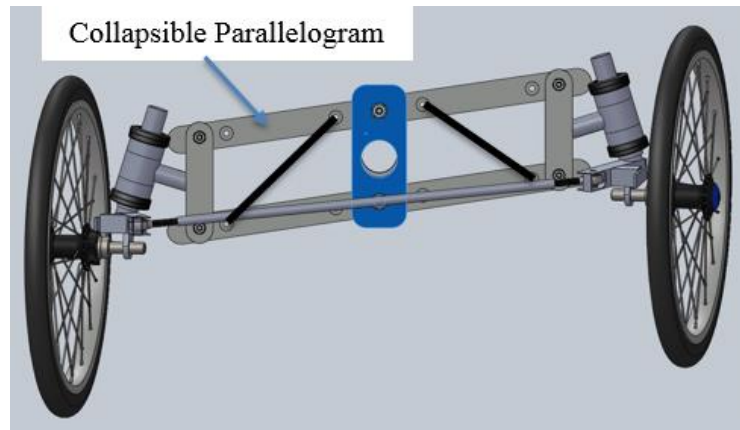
The Tilt steering design with labeled gas springs and parallelogram geometry.
